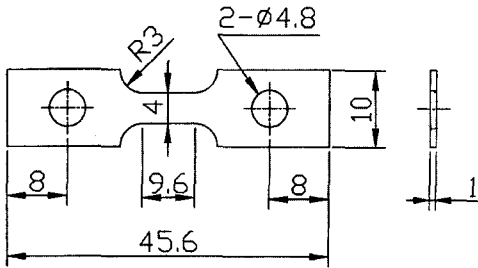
Dimension of tensile creep specimen (unit:mm)
